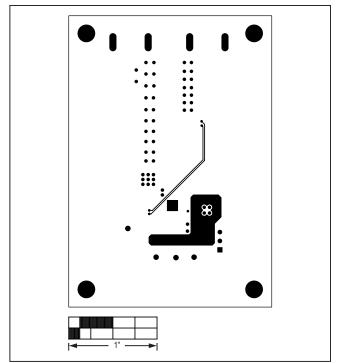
MAX20051 EV Kit PCB Layout—VCC Layer 3
